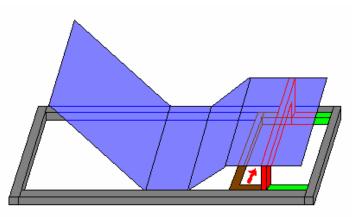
Final Design, crank-driven worm gear to lift the lower legs
